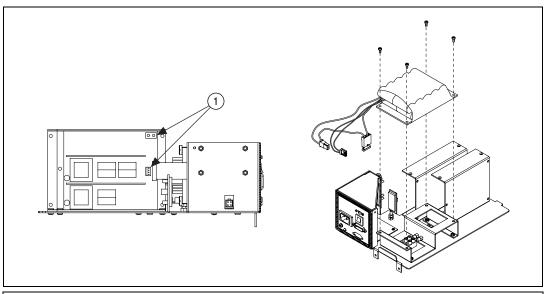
Rear of Chassis with Rear Panel and Power Supply Removed
